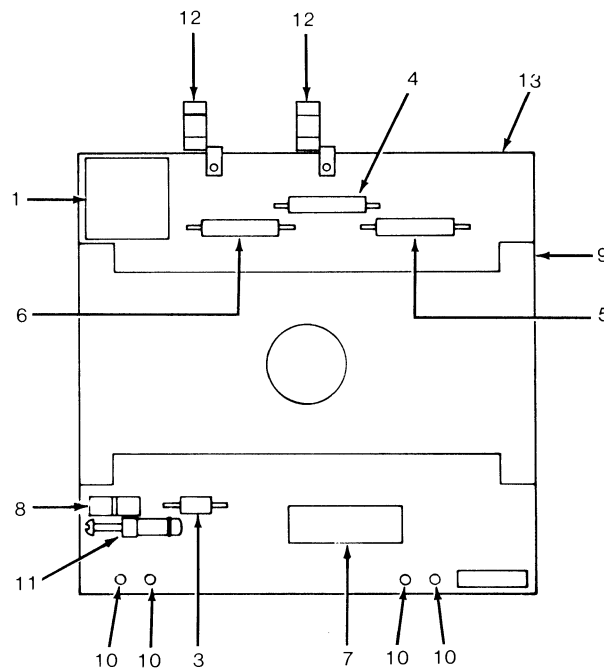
Small Circuit Board Assembly (RMS 3030 and TECH 330) for Part Location
